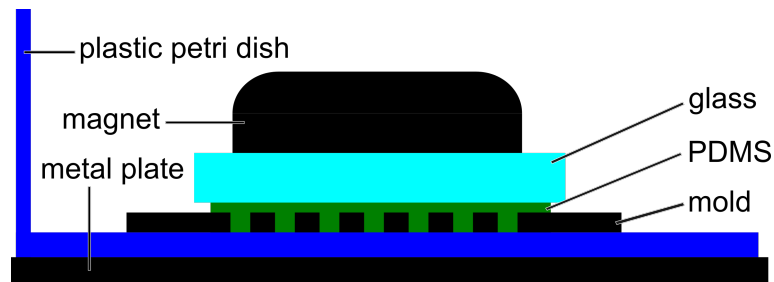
Schematic of the stamp casting process using a steel foil mold in a plastic petri dish.
